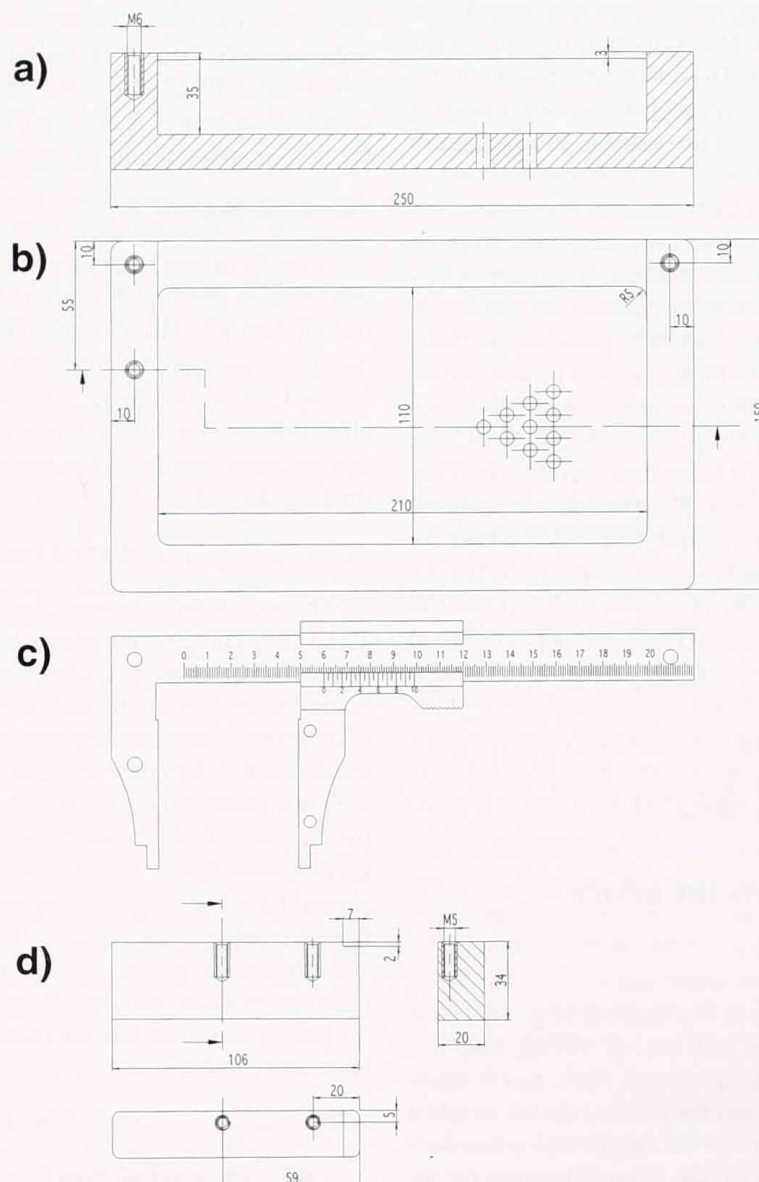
Technical drawing of the device (a) from the side where the caliper rule is attached, (b) from above, (c) drawing of the caliper rule, and (d) of the attachment. All measurements are given in mm.
